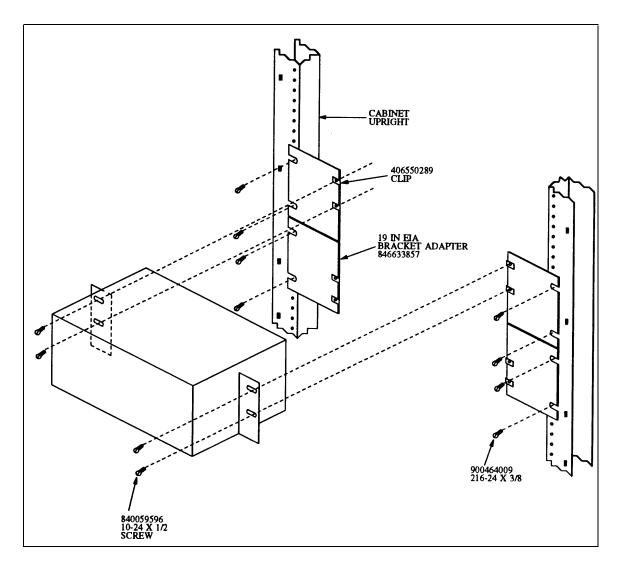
Mounting Equipment Using 19-inch EIA Bracket
